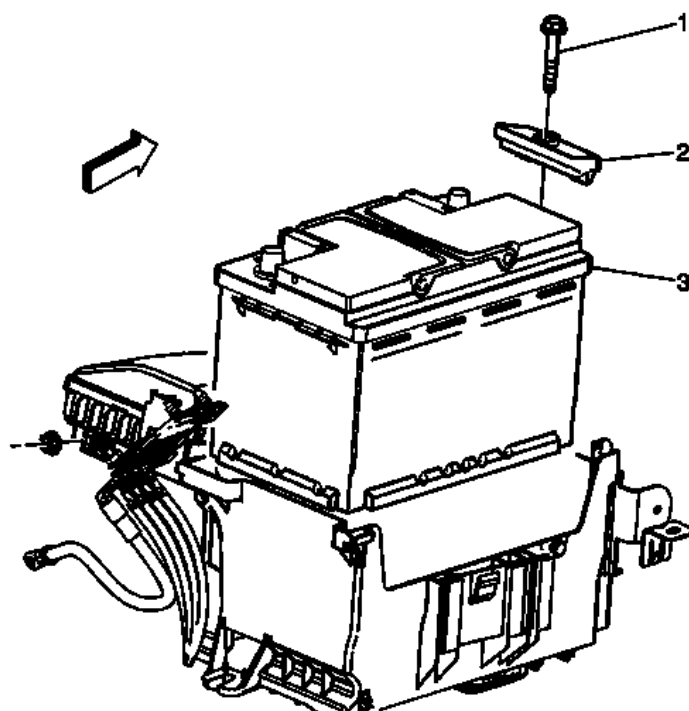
View Of Battery, Retainer Bracket & Fastener
